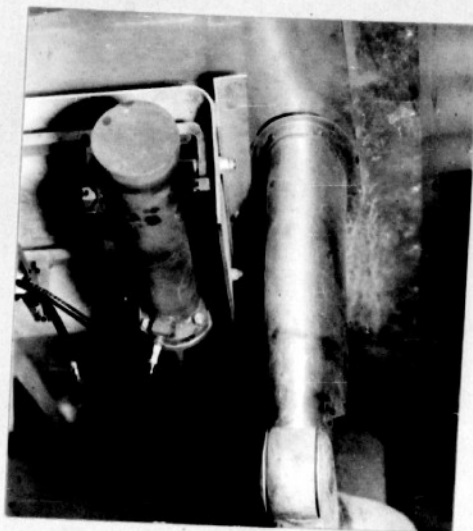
Close up of attachment assembly with one jet unit installed.
